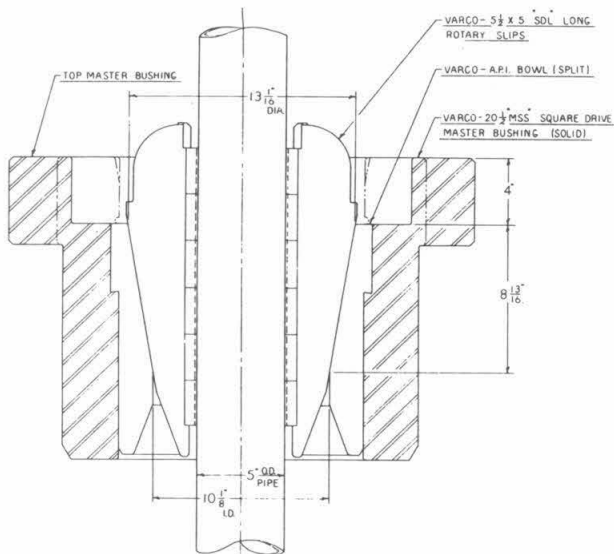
Cross section of VARCO Type SDL rotary slips complete with 5 1/2 x 5-in. inserts set on 5-in.-OD drill pipe in a VARCO Type MSS solid master bushing
